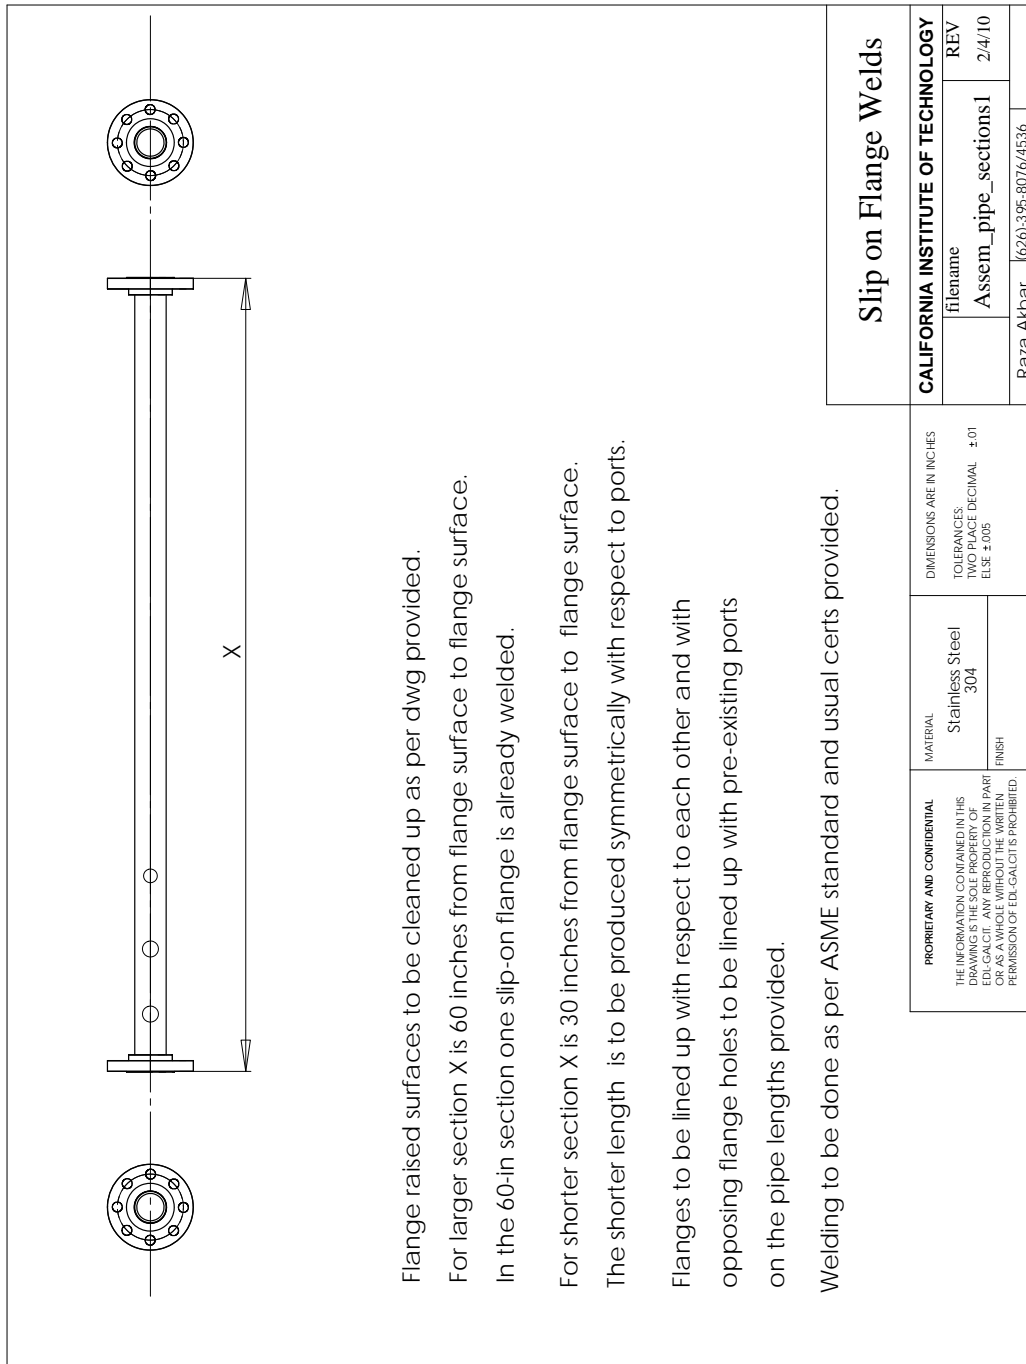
Assembly of modified SS1-3 pipe sections for D4 testing.
